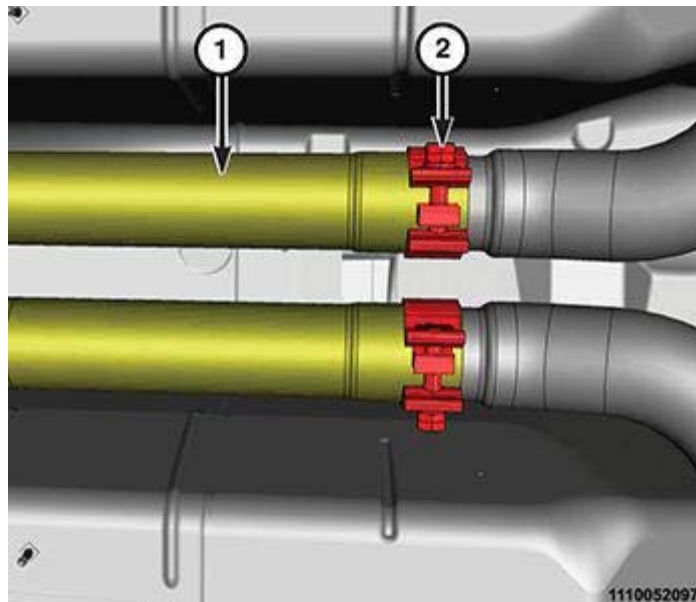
Exhaust Pipe/Muffler, Resonator Assembly & Front Exhaust Pipe Band Clamps
